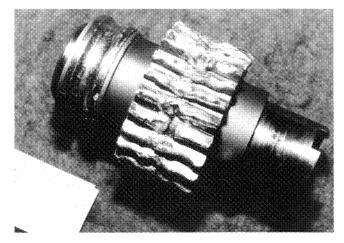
Overall View of the "Pinion Gear, Showing the Inner Race of the Broken-Up Ball Bearing Assembly Still Installed. The Teeth Seen Here Are Badly Mutilated, But None Are Broken Off.
